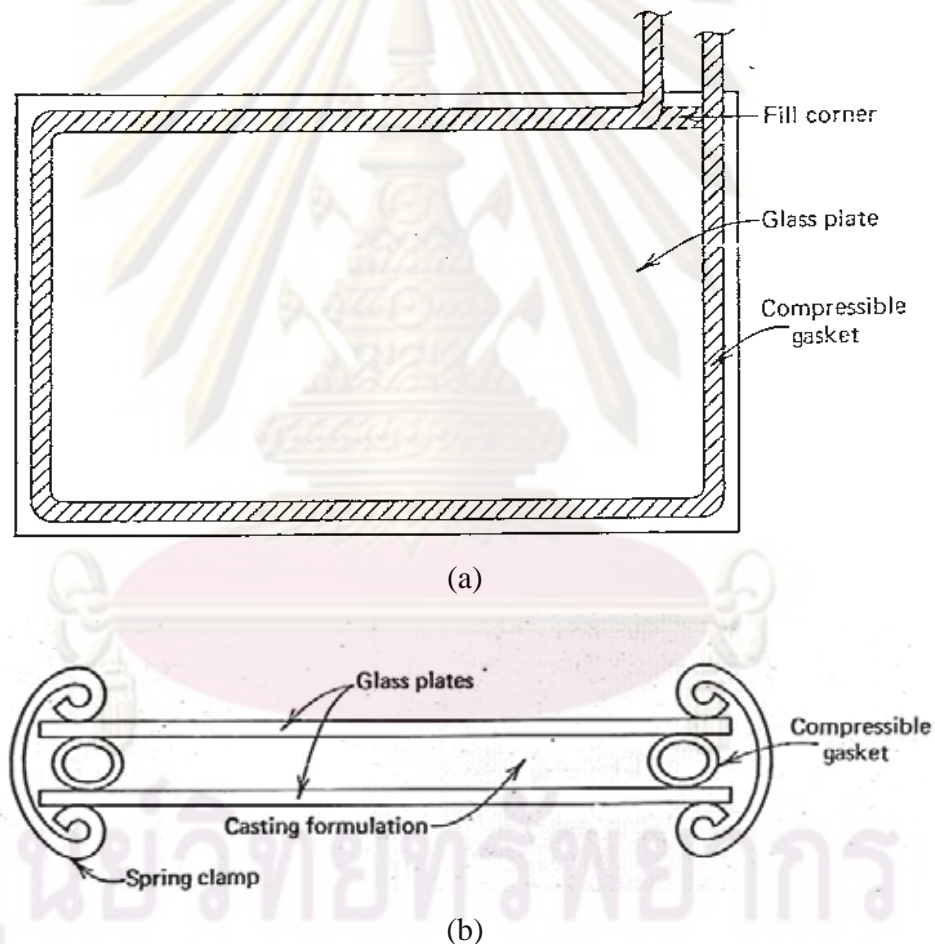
Conventional cell casting mold configuration: (a) face view and (b) edge view [10].
